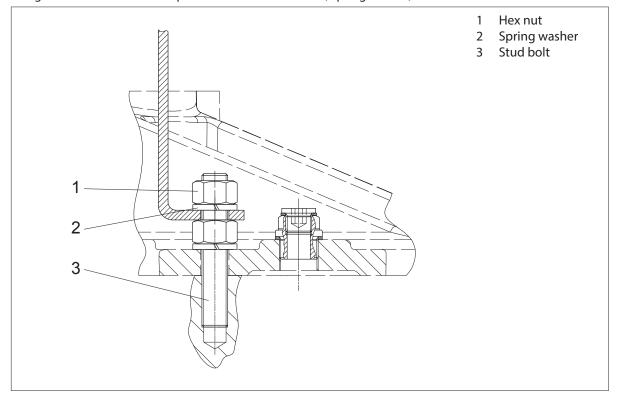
Accessory set, Part 2: Mounting set with nut and spring washer
